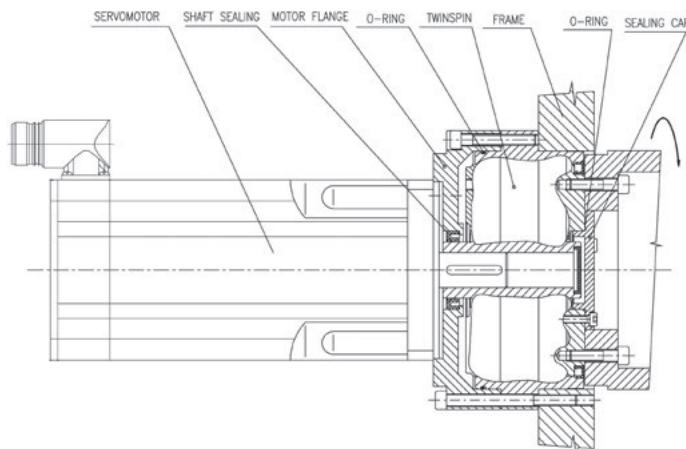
Direct connection of the reduction gear shaft with the motor shaft
